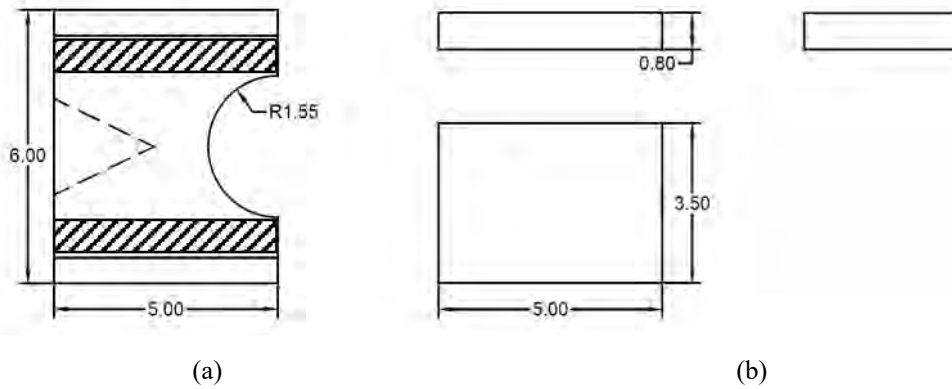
Schematic showing (a) tensile bar head dimensions and location of the cut (the marked area), and b) bend test sample dimensions (unit: mm).
